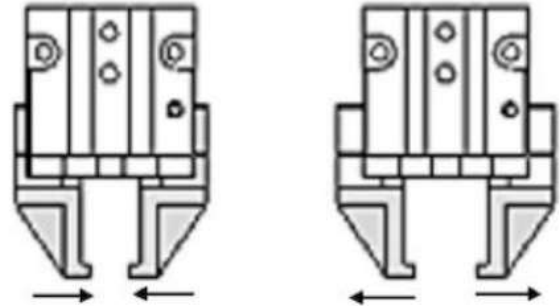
Parallel pneumatic gripper in closed and open position [16]
